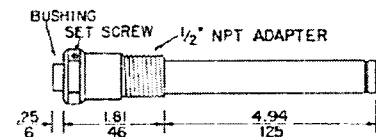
Part No. WEL14A-600R bulb well for liquid immersion applications where the temperature bulb may be removed without draining the tank.
